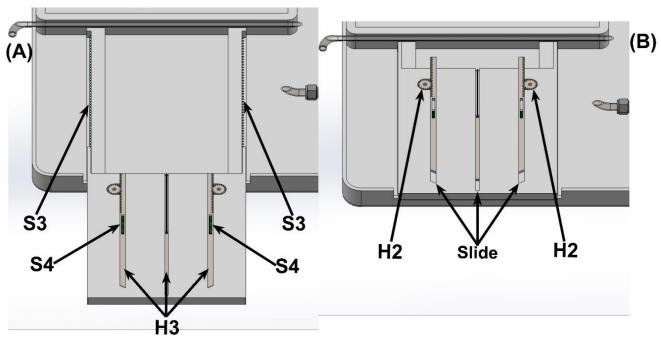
(A) Top cut section open position view, (B) Top cut section closed position view of automatic cell culture dish holder.
